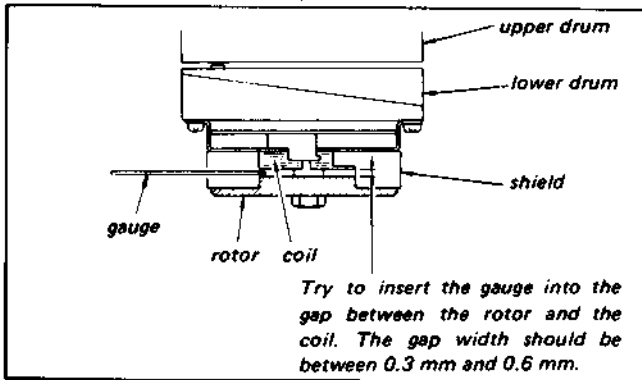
Checking the motor gap width after replacing the drum assembly
